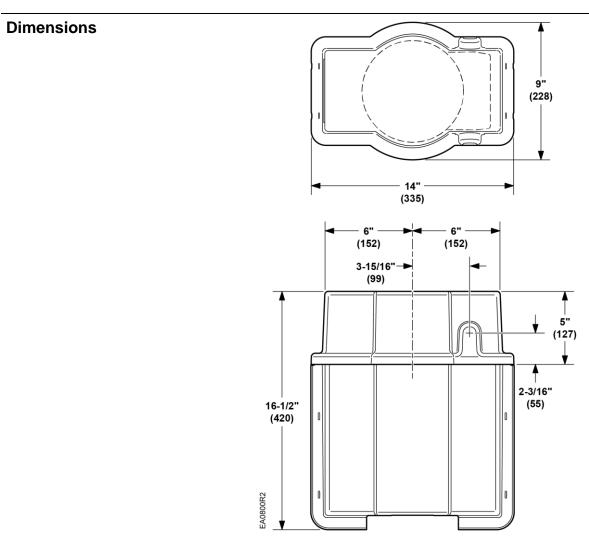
Dimensions of the 599-10065 Weather Shield in Inches (Millimeters).
